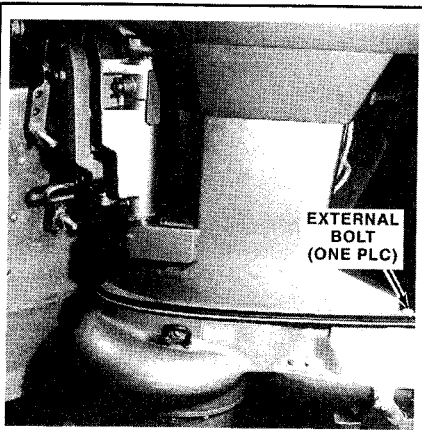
To unbolt the drive remove any external bolts (usually 1) . . .
